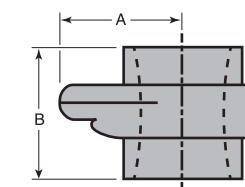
Butt Weld Schedule 160 and XXH
